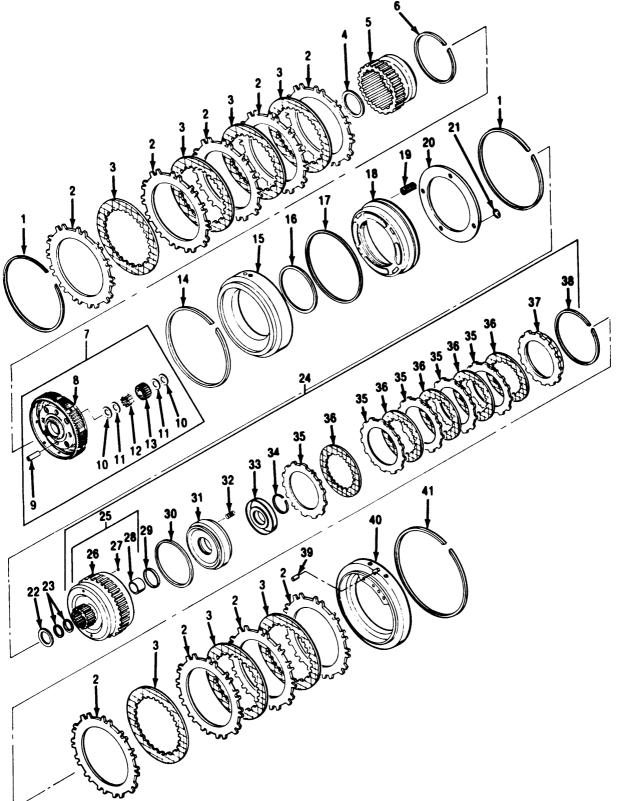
2nd and 3rd Clutch, Front Carrier, 4th and Reverse Clutch
